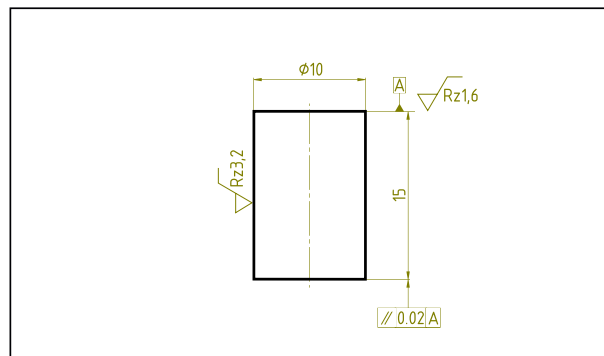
Drawing of compression specimen geometry with cylindrical gauge section and a diameter of 10 mm.
